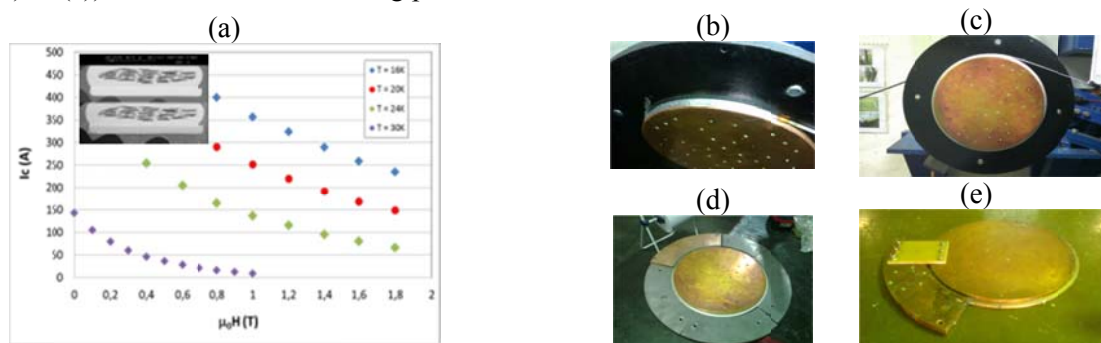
(a) MgB_2 sandwich class wire and current vs. magnetic field characteristics. Manufacturing process: soldering internal terminal (b), winding (c), impregnation tooling (d) and end coil (e)
